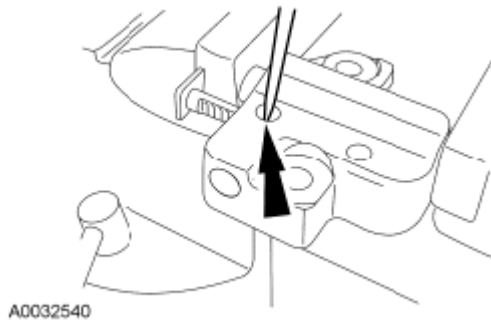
Holding Ratchet Mechanism Using Small Pick
